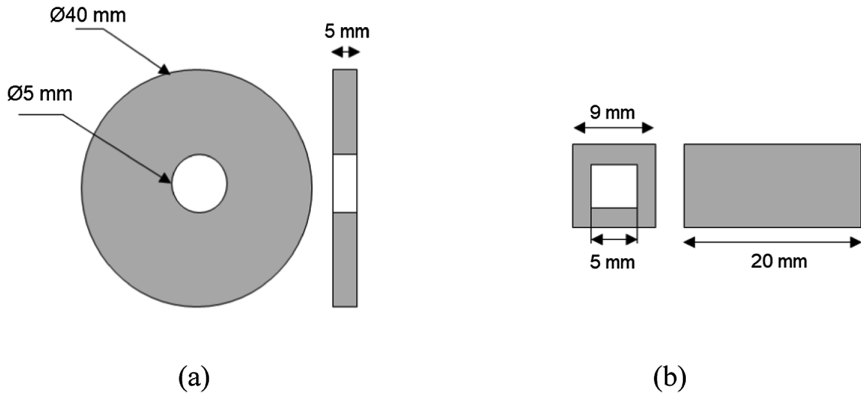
(a) Cavitation inducer and (b) workpiece dimensions.
